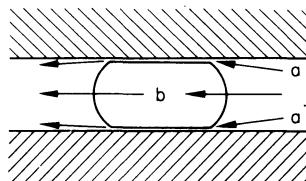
Possible leak paths in gasket seals: (a) between the sealing surfaces; (b) through the gasket
